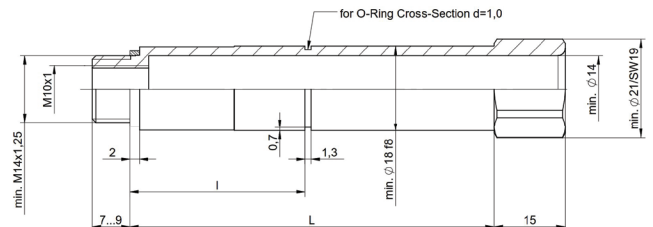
Installation with mounting sleeve Type 6560AQ...
